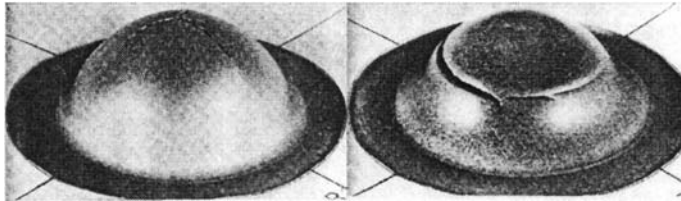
Fracture geometry for (left) deep drawing and (right) hydroforming. (From Ref. 51.)
